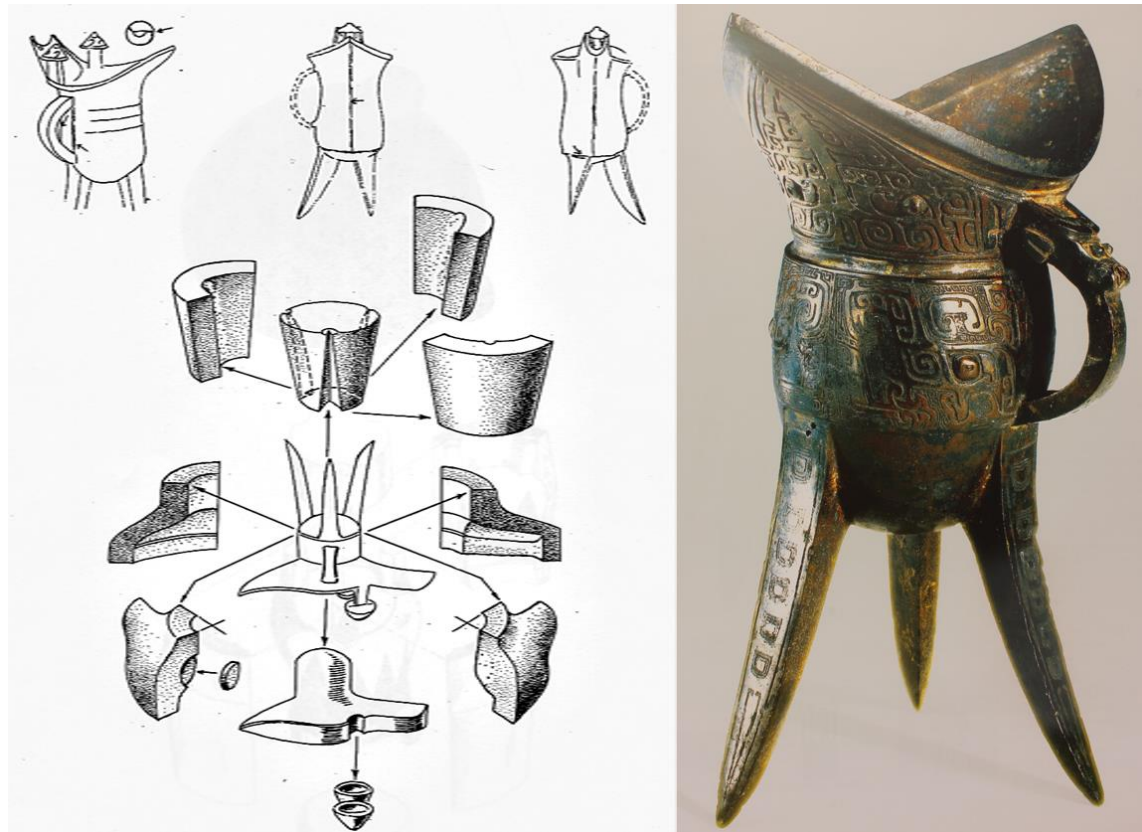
Scheme of the piece-mould casting technique and *Jue* for drinking or pouring liquors (1600-1100 BC) produced by this technique.
